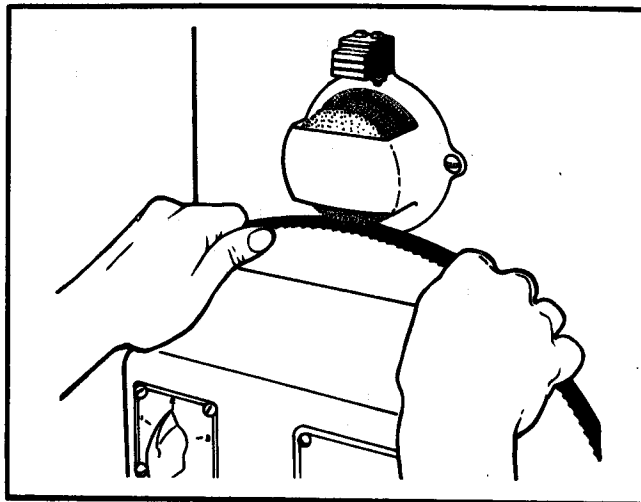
GRINDER & BAND THICKNESS GAGE.
